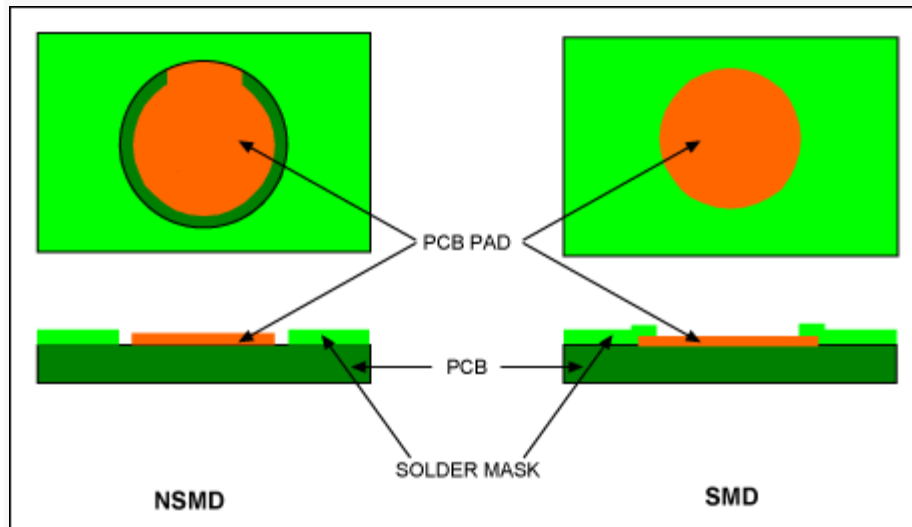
SMD vs. NSMD PCB land pad design for WLP.
